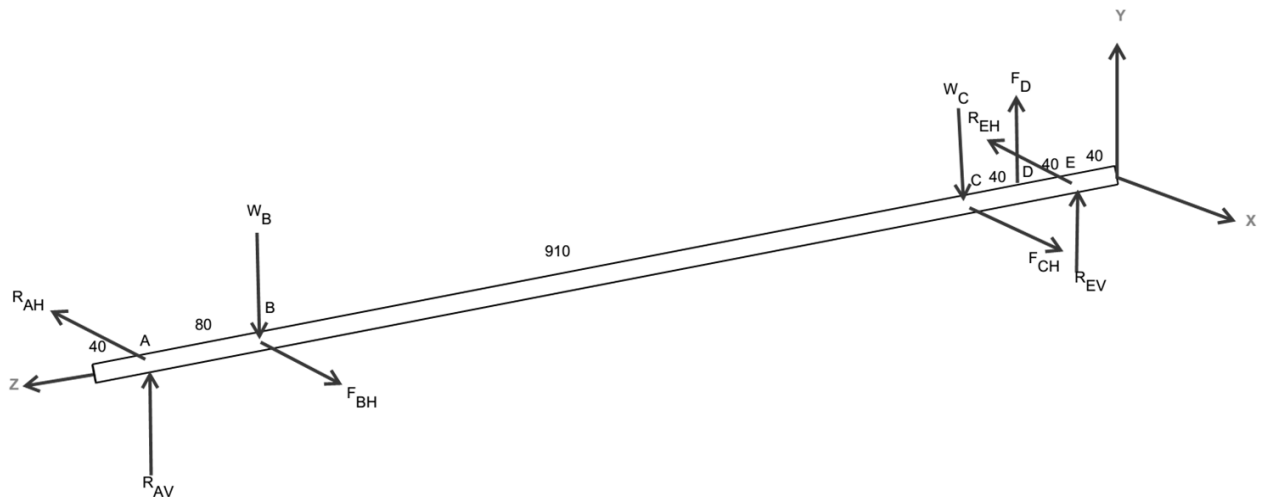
Three dimensional view of the forces acting on the wheel shaft
